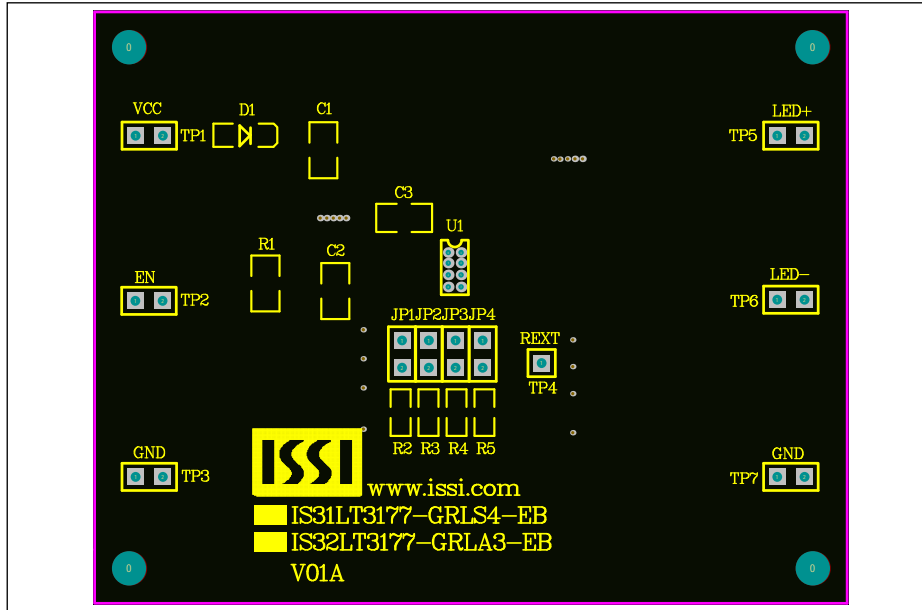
Board Component Placement Guide - Top Layer (SOP-8-EP)
